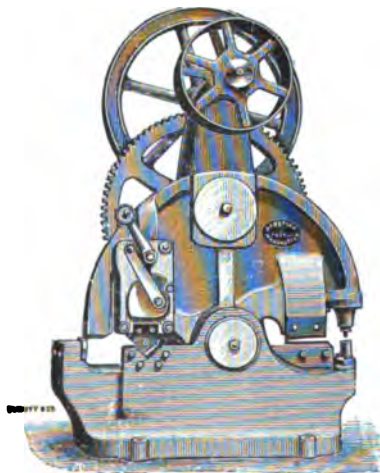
Combined punching, cropping, and angle shearing machine.
